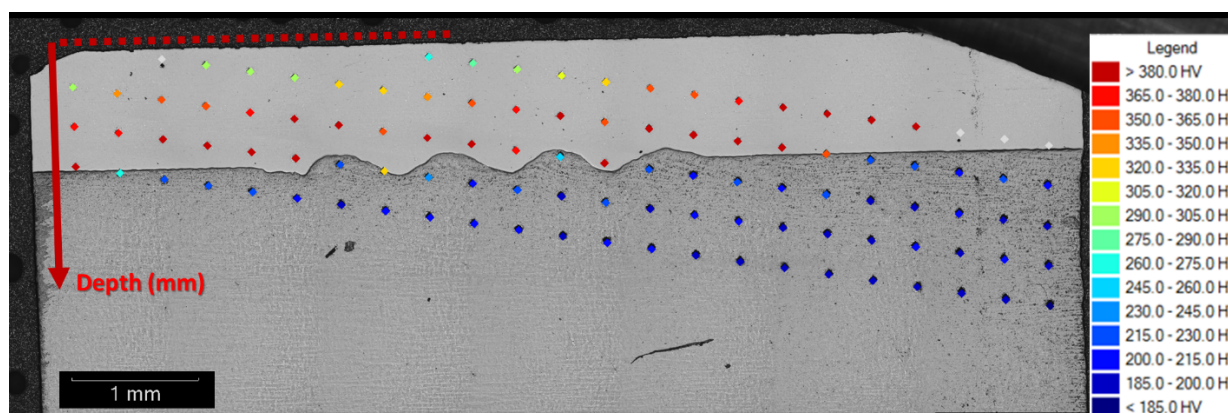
Optical image of cross section of unirradiated explosion welded plate with color coded microhardness indents.
